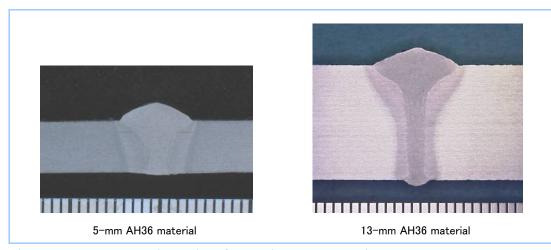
Bead cross-sectional views for hybrid laser-arc welding
